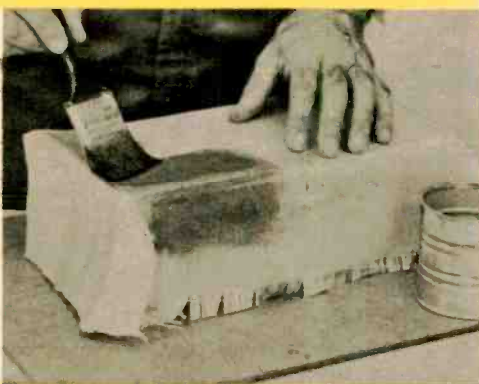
Lay a piece of 7-oz. fiberglass cloth on box and impregnate with resin. Use rubber squeegee to remove bubbles, smooth surface.
